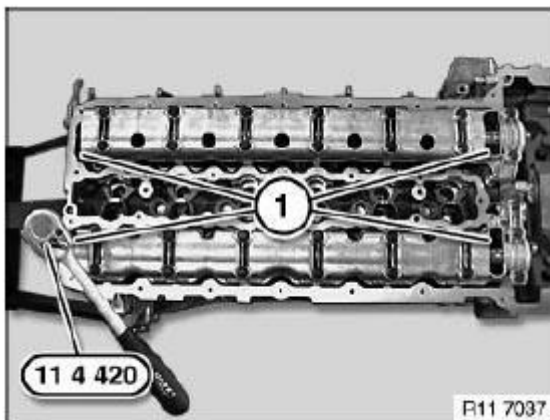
Identifying M9 Cylinder Head Bolts With Special Tool 11 4 420
